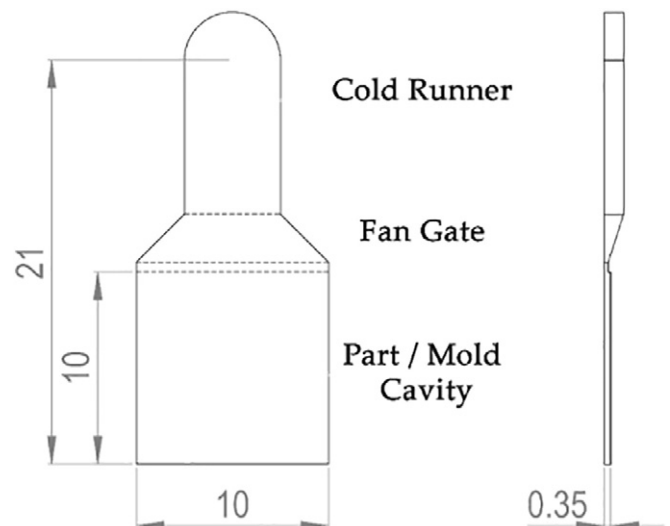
Design of the study part. All dimensions are expressed in millimeters.
